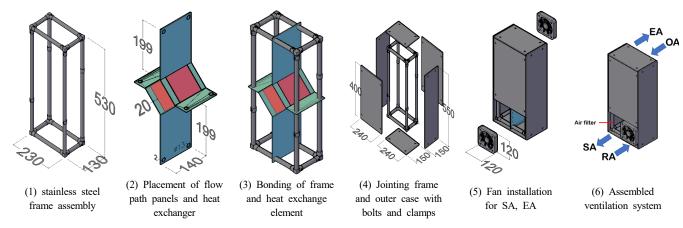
Assembly sequence and device overview of window-mounted ventilation system (mm)
